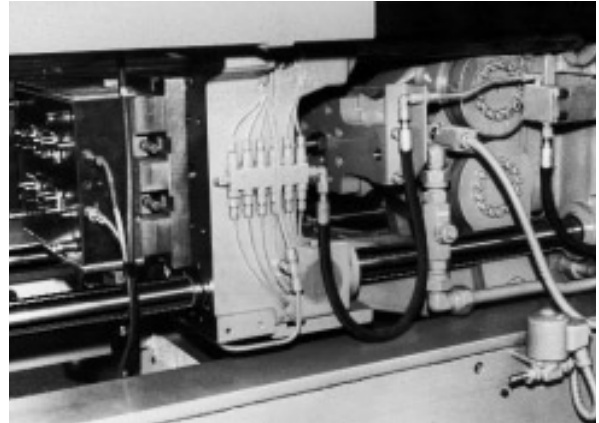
· Details of the injection moulding machine shown in Fig. 23, with the cranks, Locking Assemblies RfN 7012, and plate.
